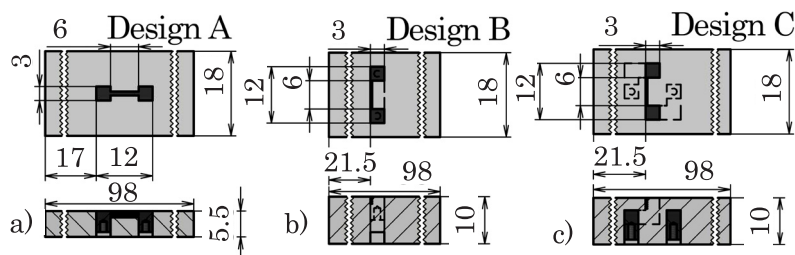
Schematics of slab fuels (drawn in mm): a) Design A; b) Design B; c) Design C.
